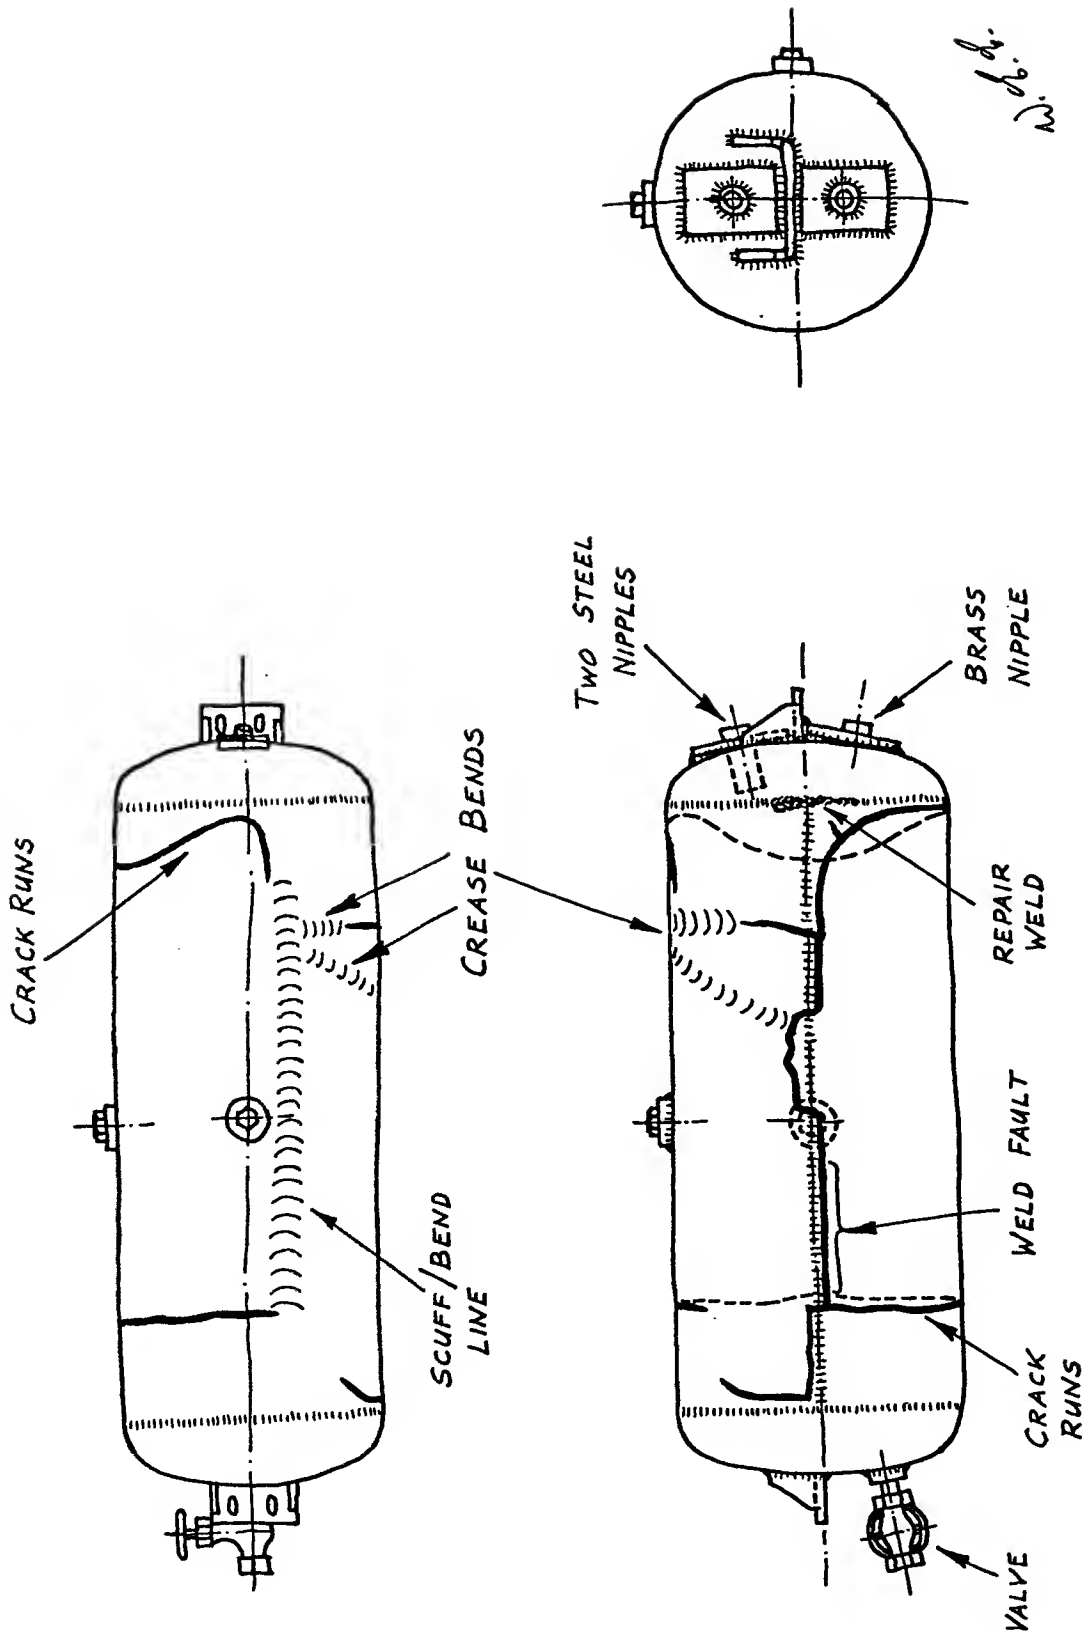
INTERMEDIATE AIR RECEIVER, E.R.C.B. - FRACTURE
